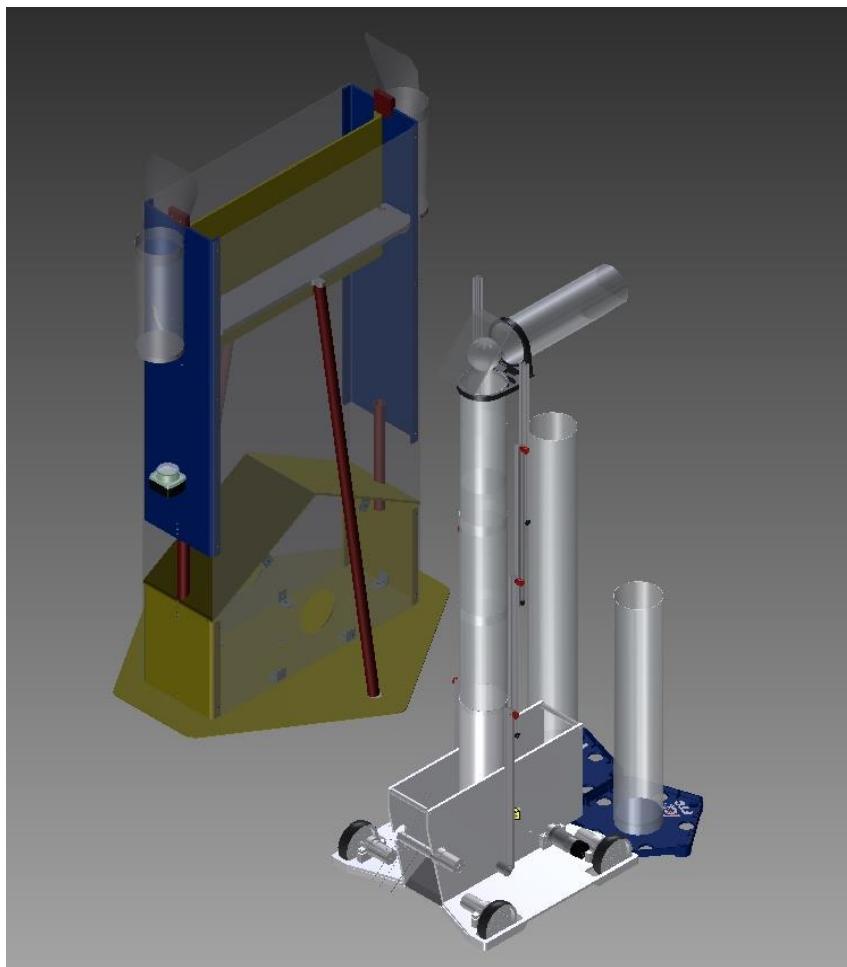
CAD/Vertical Lift, Ball Holder, and Fewer Tubes
